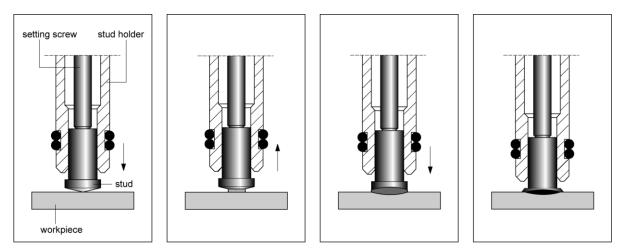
Short-cycle drawn arc stud welding technology
